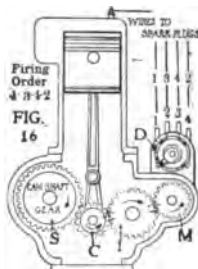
Rear View of distributor (D) turns in a clockwise (right-hand) direction so that it next will
